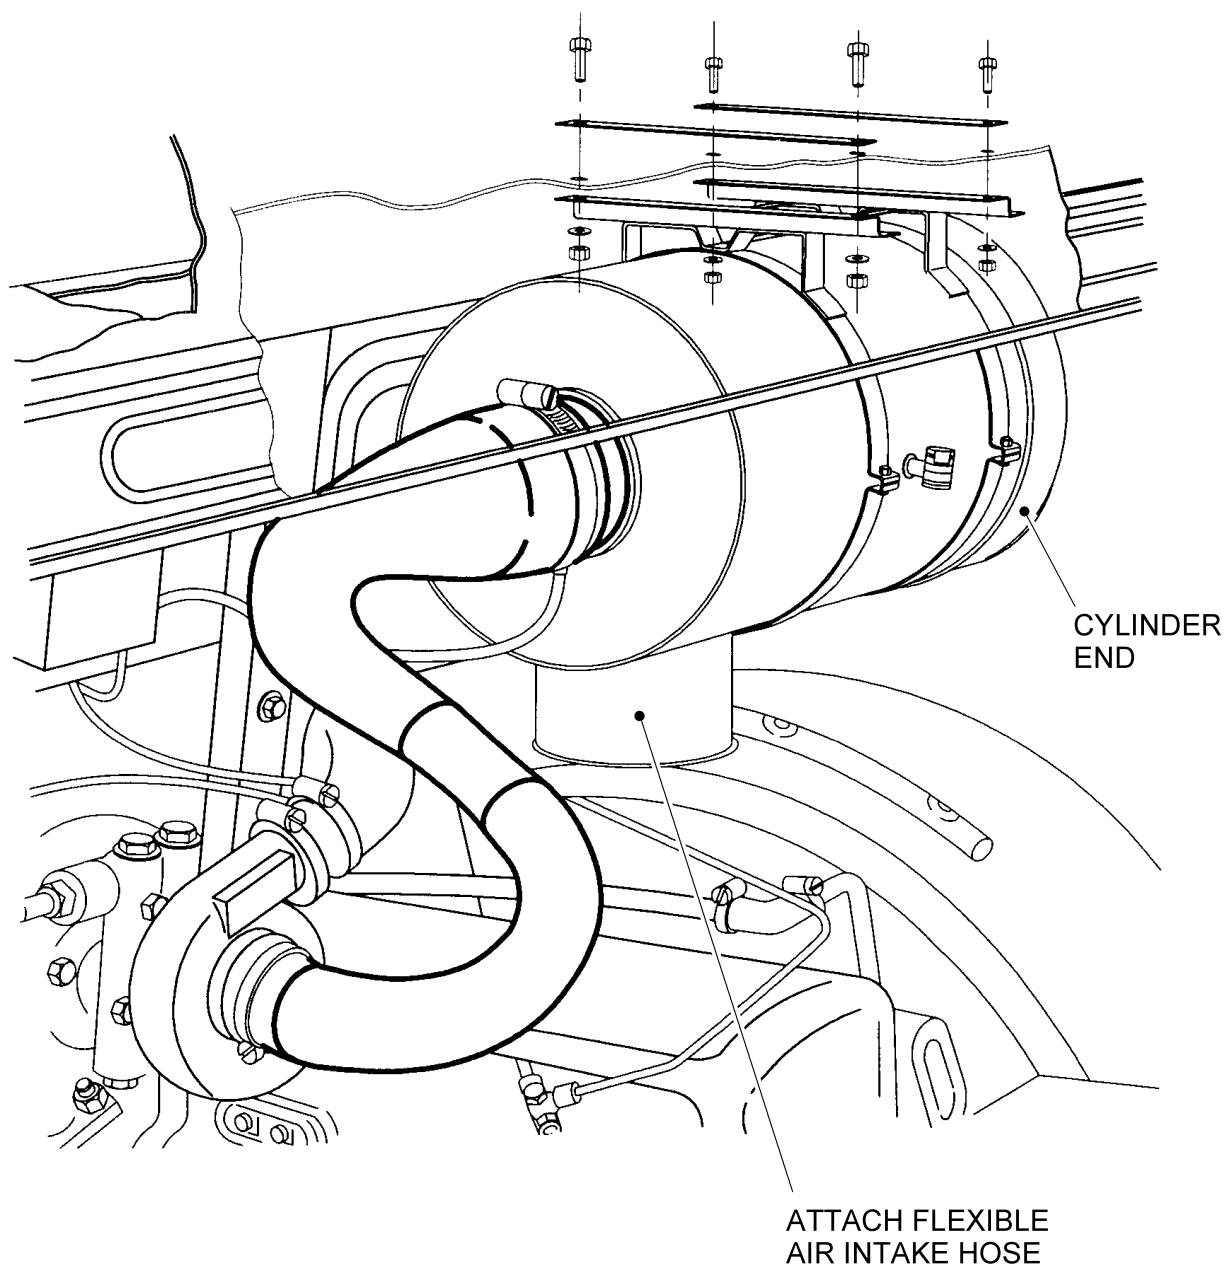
Air Cleaner Assembly (NSN 2945-99-480-8035)
